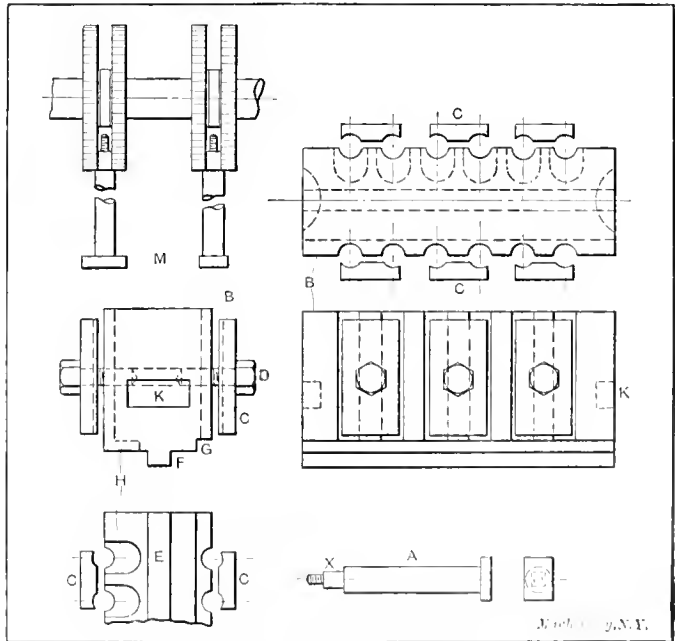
Fixture for Milling Square X on Bolts A in Correct Relation with Rectangular Heads
